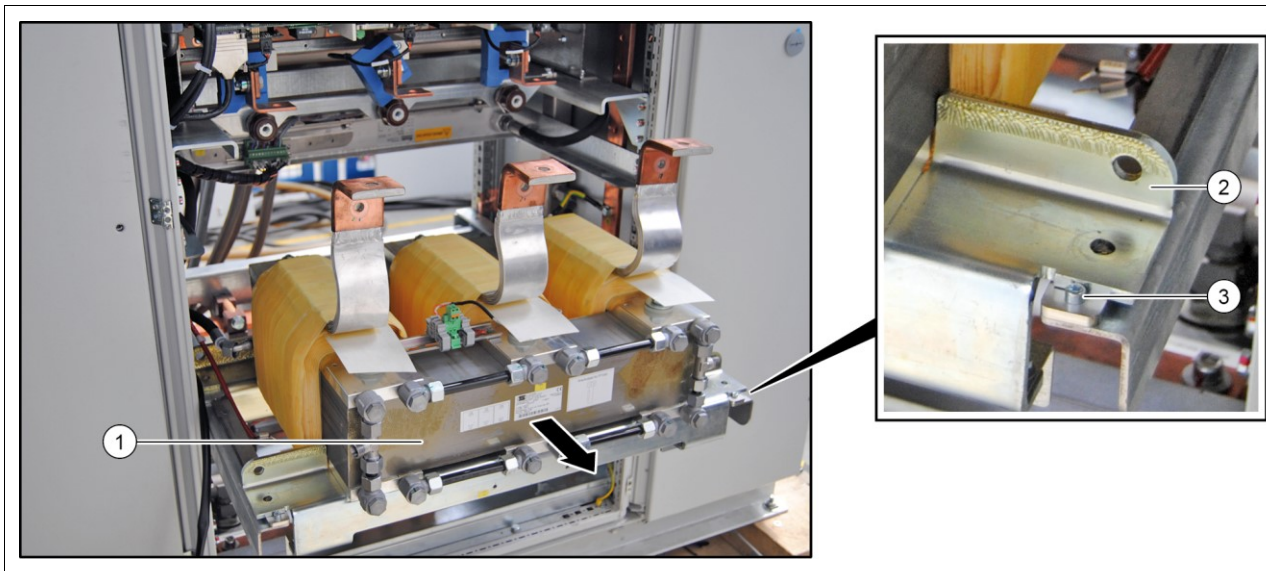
Stop screws of the disassembling rails (here as an example for the line choke)
